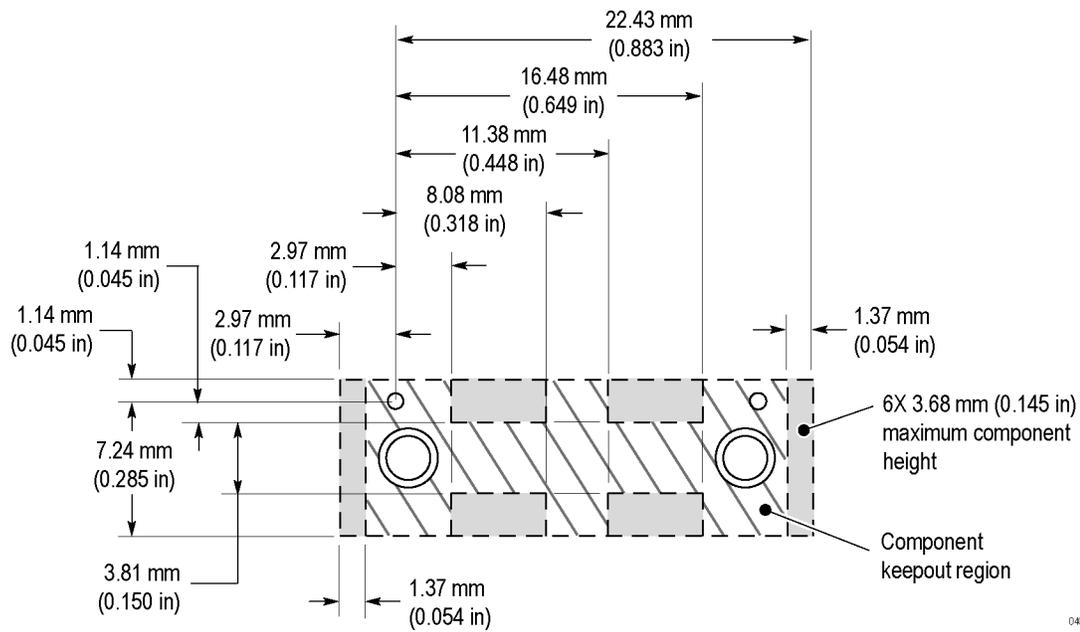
x4 midbus footprint dimension and keep-out area (back side of circuit board)
